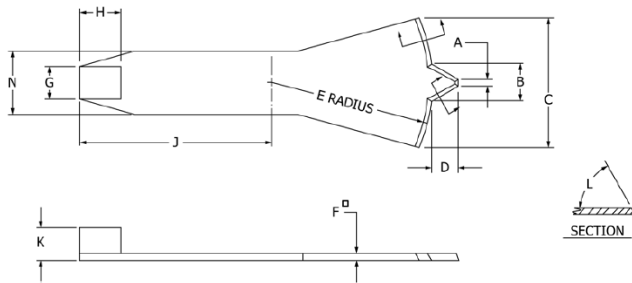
Grooving Tool (from ASTM 4318-17)
